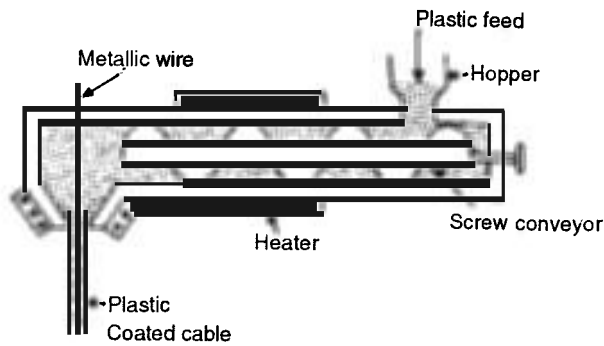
Moulding of Cable by Vertical Extrusion Moulding
